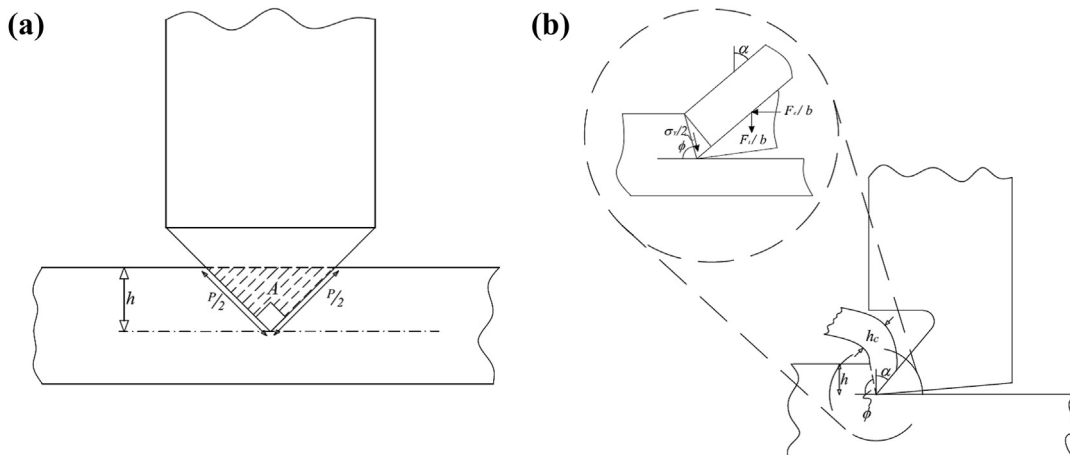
Scratch tool geometry (a) View in scratch direction and (b) side view.
